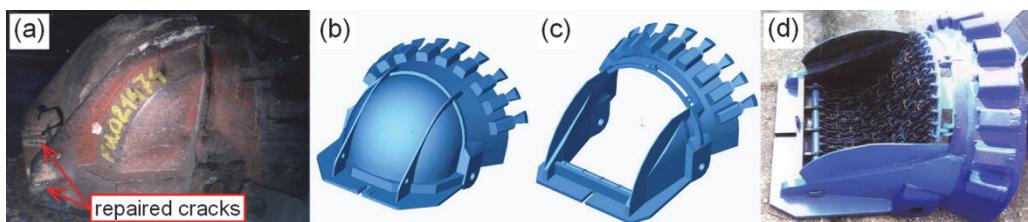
Bucket structure: (a) original design; (b) 3D model of original bucket; (c) 3D model of redesigned bucket; (d) reconstructed bucket
